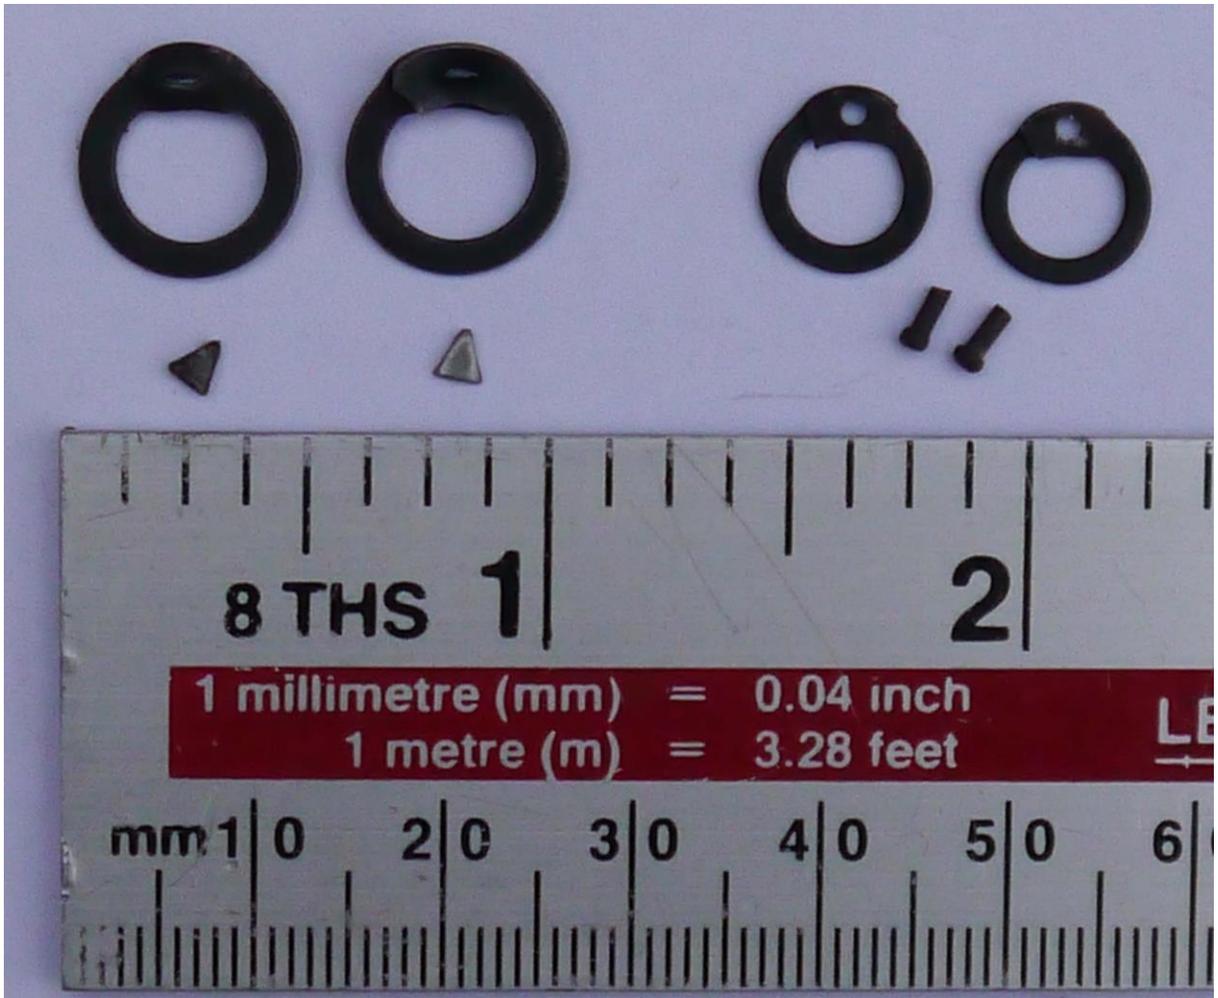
(Left) 8 mm Rings and Wedge Rivets, (Right) 6 mm Rings and Round Rivets
